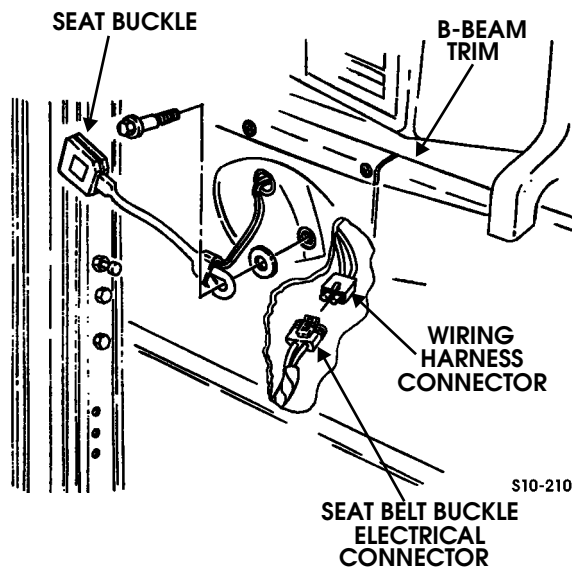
Seat Belt Buckle Electrical Connector Location
